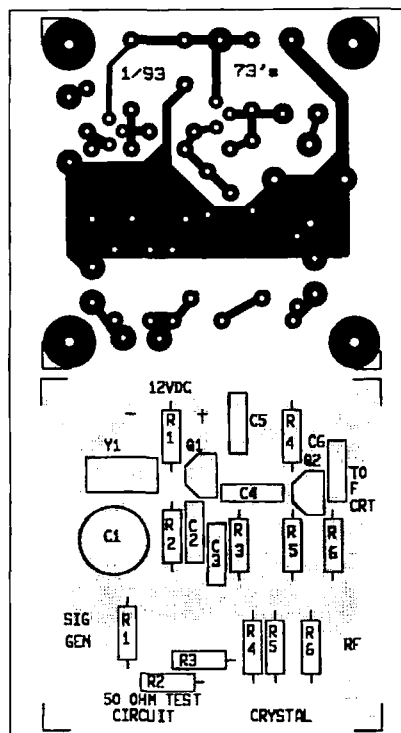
(a). PC board foil pattern for the oscillator circuit. (b). Parts placement. Note that the 50-ohm test circuit shown in Figure 3 is incorporated on this board.
